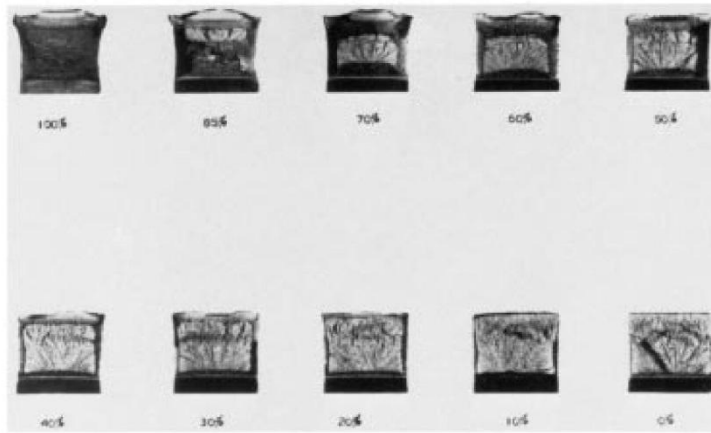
Fracture Appearance Charts and Percent Shear Fracture Comparator
